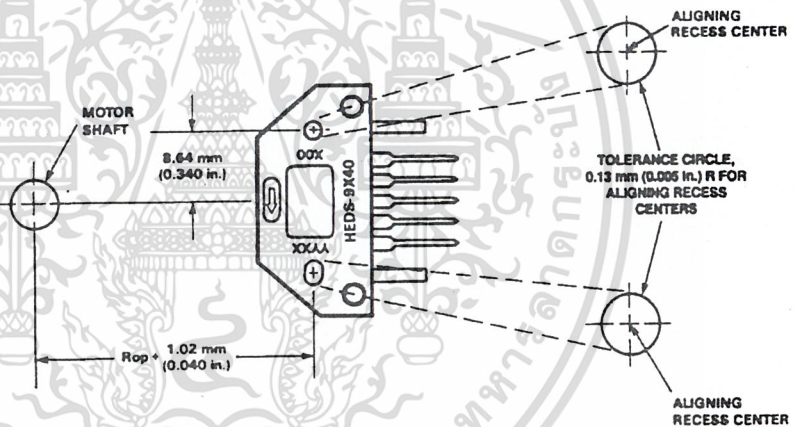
HEDS-9X40 Mounting Tolerance.
